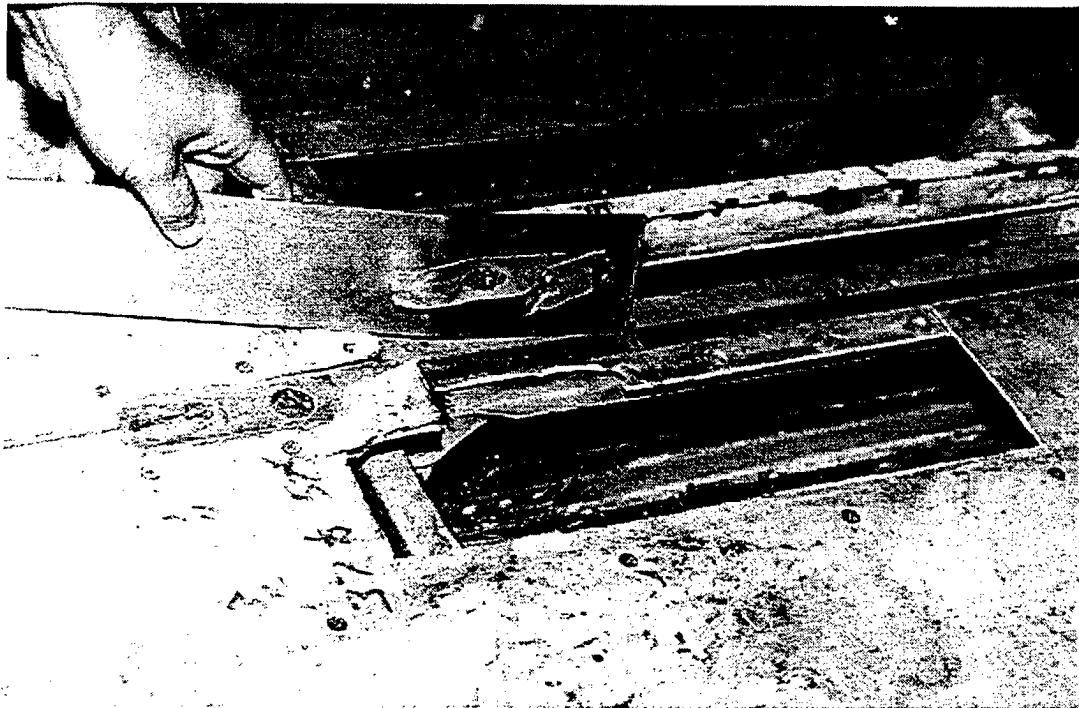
POSTTEST AUXILIARY FUEL TANK LOWER RIGHT BRACKET
